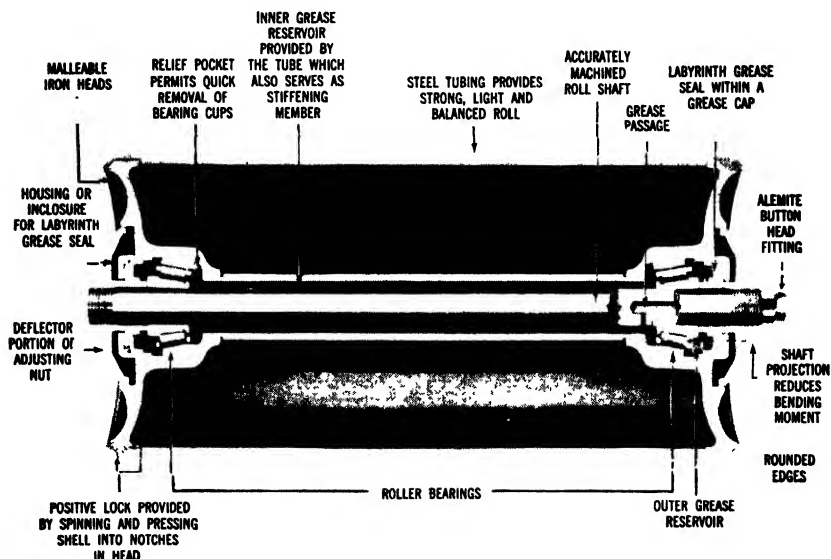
Cross-sectional View of a Roll (Link-Belt Company)
